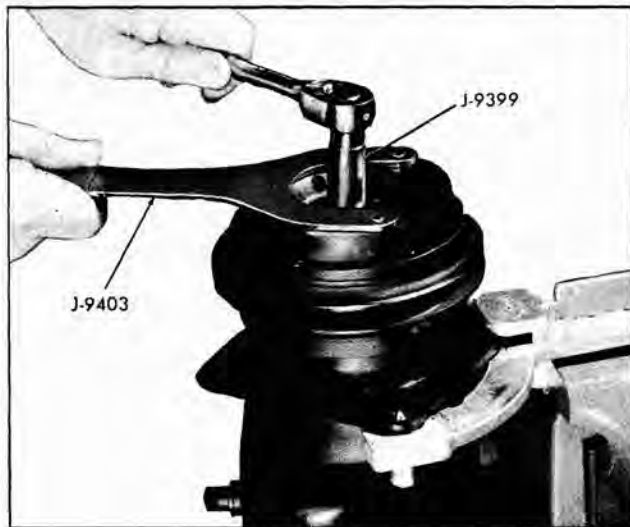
Removing Hub and Drive Plate Lock Nut
